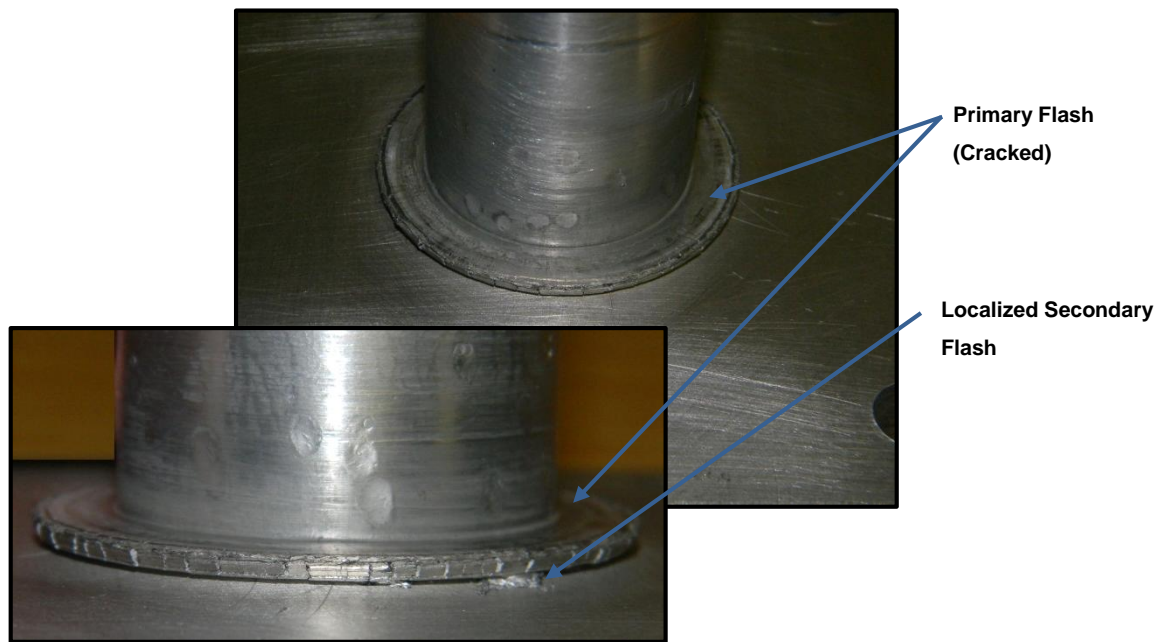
Flash Formation of Weld S.1 (40kN Axial Force)
